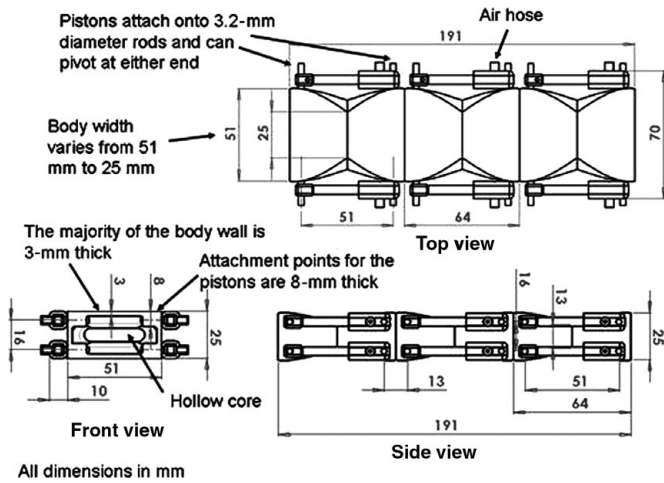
Mechanical drawing of the bio-inspired caterpillar robot.
